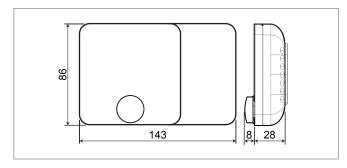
Dimensional drawing for the zone operator terminal for surface mounting (dimensions in mm)
